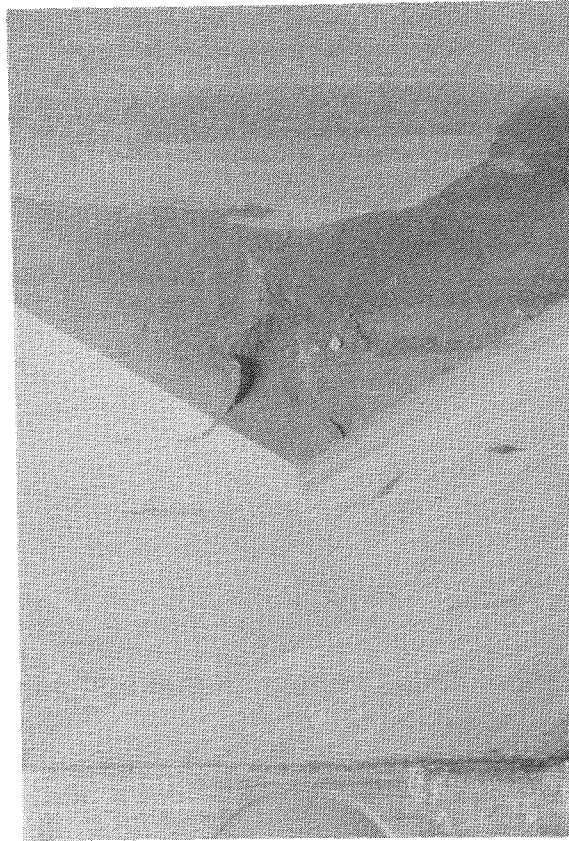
Fatigue crack surface marked with Zygo in arrester geometry.
